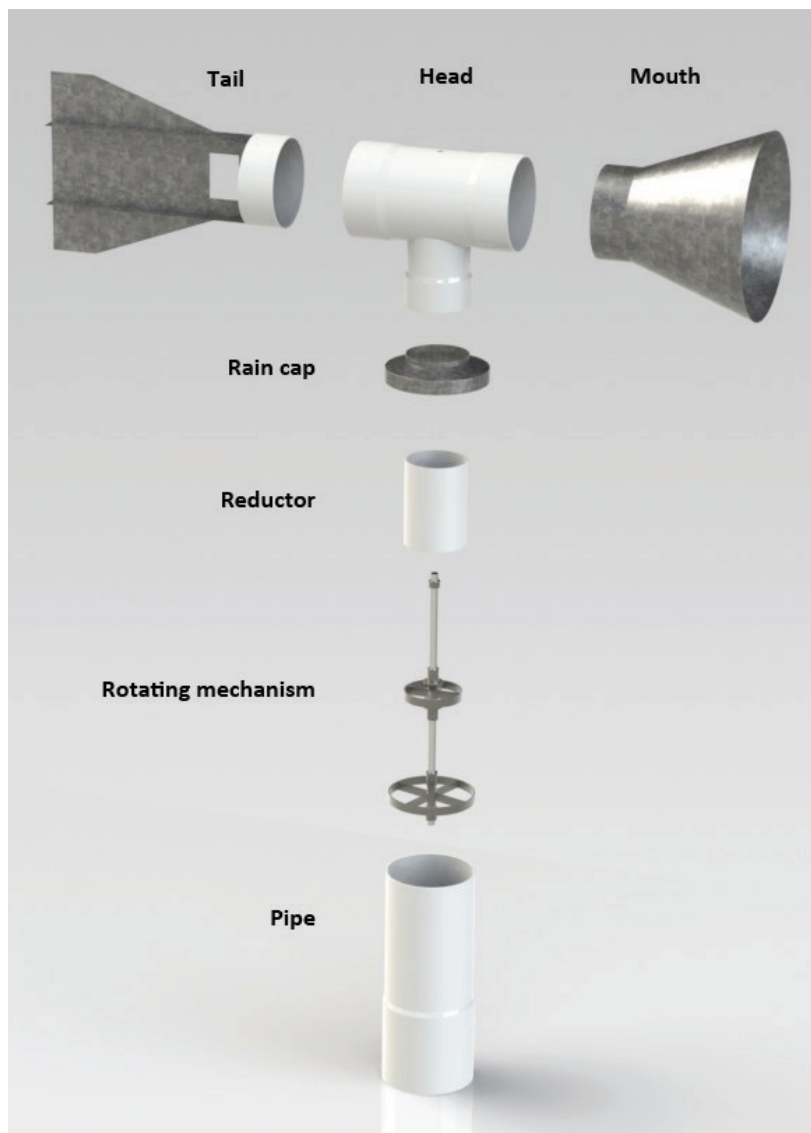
Parts of the (rotating) wind pipe in a exploded view.
